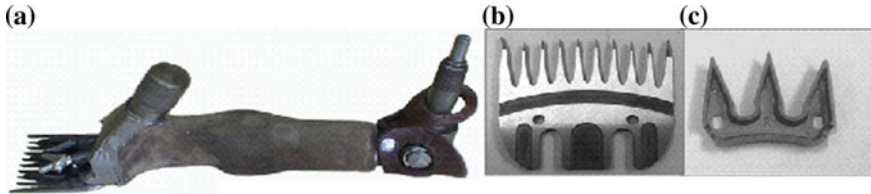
Photographic view of a sheep hair shearing machine assembled at IIT Delhi and tribological components of sheep hair shearing machine; b Comb, and c Cutter
